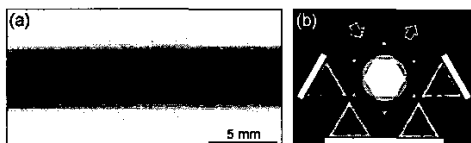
A polyurethane tube with a defect. (b) Schematic of an optical adapter consisting of mirrors, which would allow the detection of defects in the tube, during production, by a single axial scan. Cracks, inclusions, deformations can be detected.
